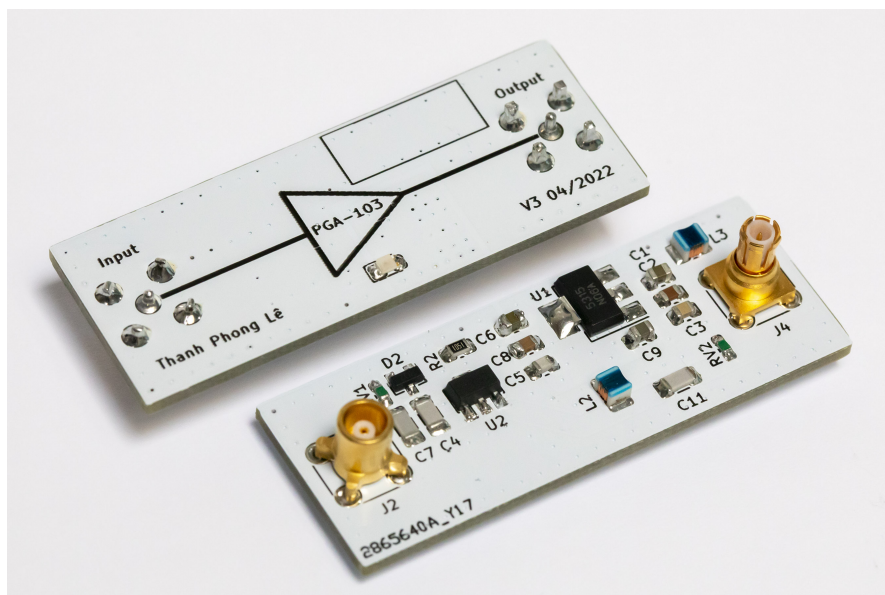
Pictures of the LNA for the MRI coil. The preamplifier is directly stacked on the main board of the receive coil using the pair of MCX connectors as mechanical support. Note that the reference designators on the assembled boards do not match the simplified schematics.
